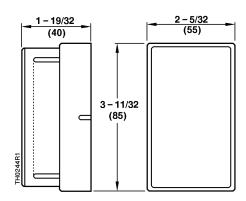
TH 193 HC Dimensions in Inches (Millimeters).
